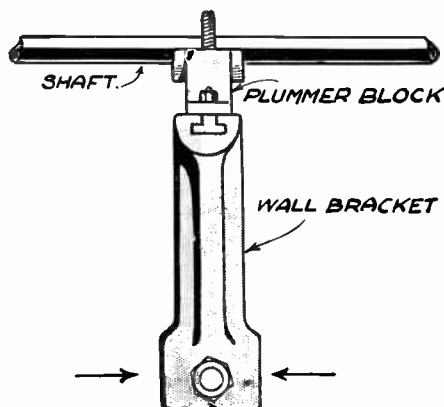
TAP BRACKET IN DIRECTION OF ARROWS TO ENSURE BEARING TOUCHING SHAFT OVER ITS WHOLE LENGTH.
